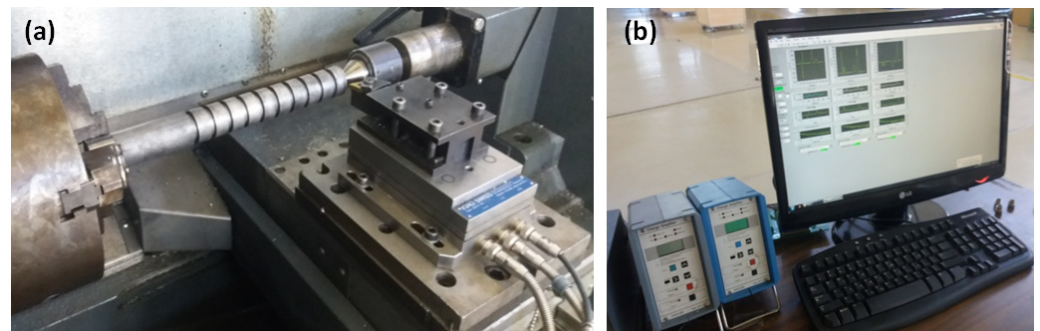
(a) CNC machining set-up for dry CNC turning experiments; (b) Cutting force acquisition/signal processing software environment.
